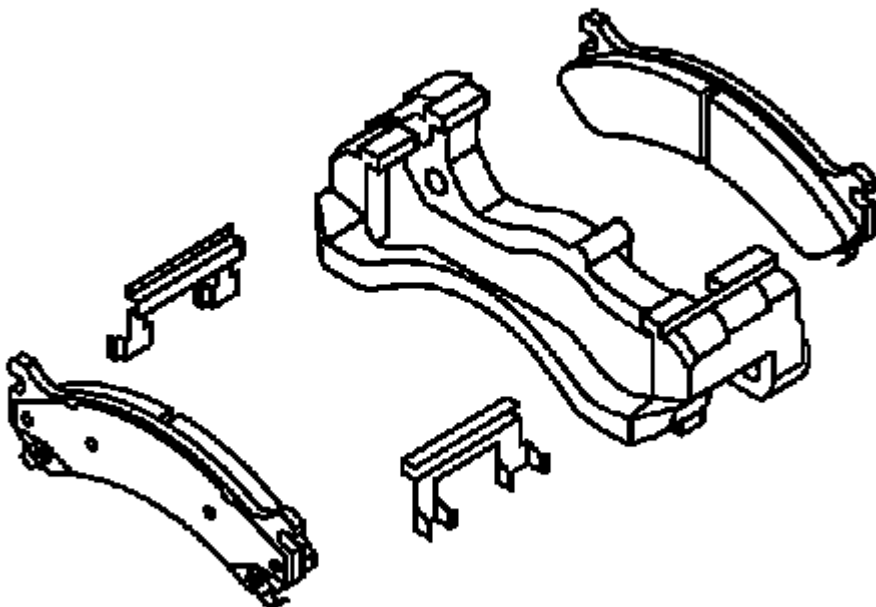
View Of Disc Brake Pads & Brake Caliper Mounting Bracket
